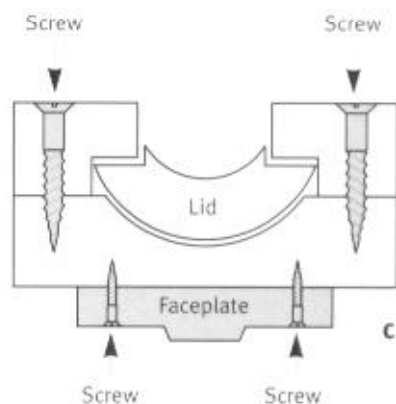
Holding the lid while hollowing out its underside presented a problem. This was solved by making a chuck out of two pieces of waste wood which were clamped together with two screws, holding the lid fast between them. The two pieces of wood were then screwed together, with one fastened to a faceplate, the other having had its centre removed with a step cut into the side of the recess. You can see the waste piece removed on the tool rest.
